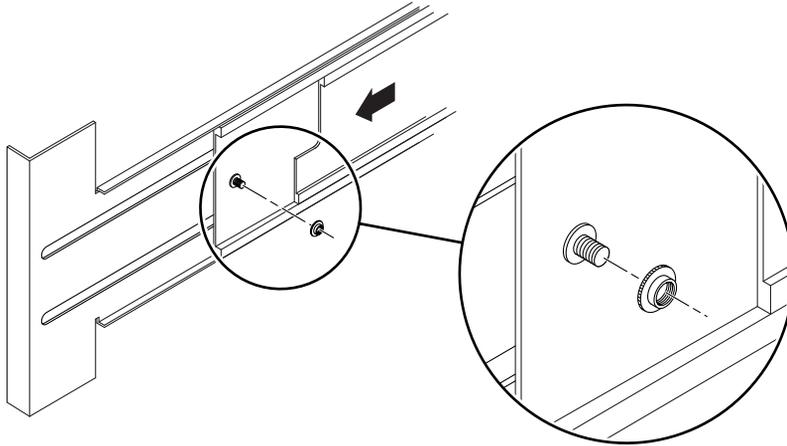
Inserting and Tightening the Slide Rail Spacer
